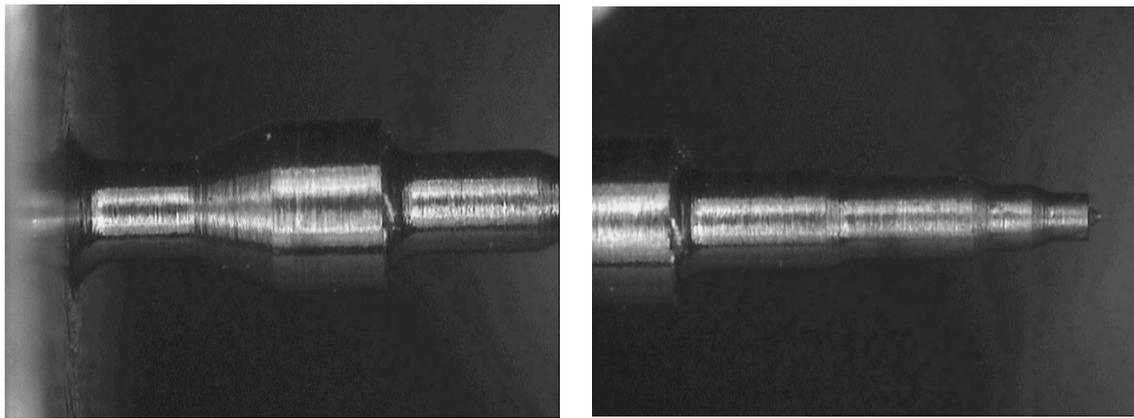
A part produce using Disk-2 cut tool path for taper cutting.
